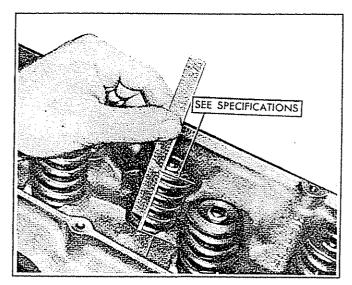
A2-22 — Measuring Valve Spring Installed Height
